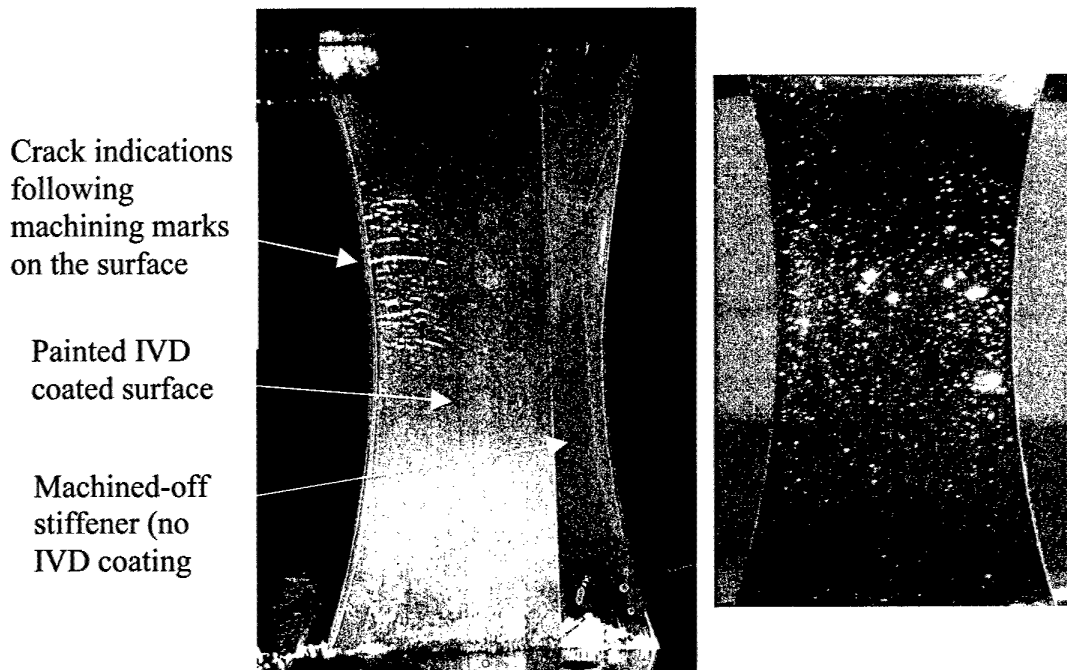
One of the spare thin FT488/2 specimens (left), and a KW specimen, after testing to near failure. Dye penetrant has been used to show the extent of fatigue cracking. The indications for the FT488/2 specimen suggest that the cracking is initiating at the base of shallow machining marks, while the indications for the KW specimen suggest a random distribution of initiations.
